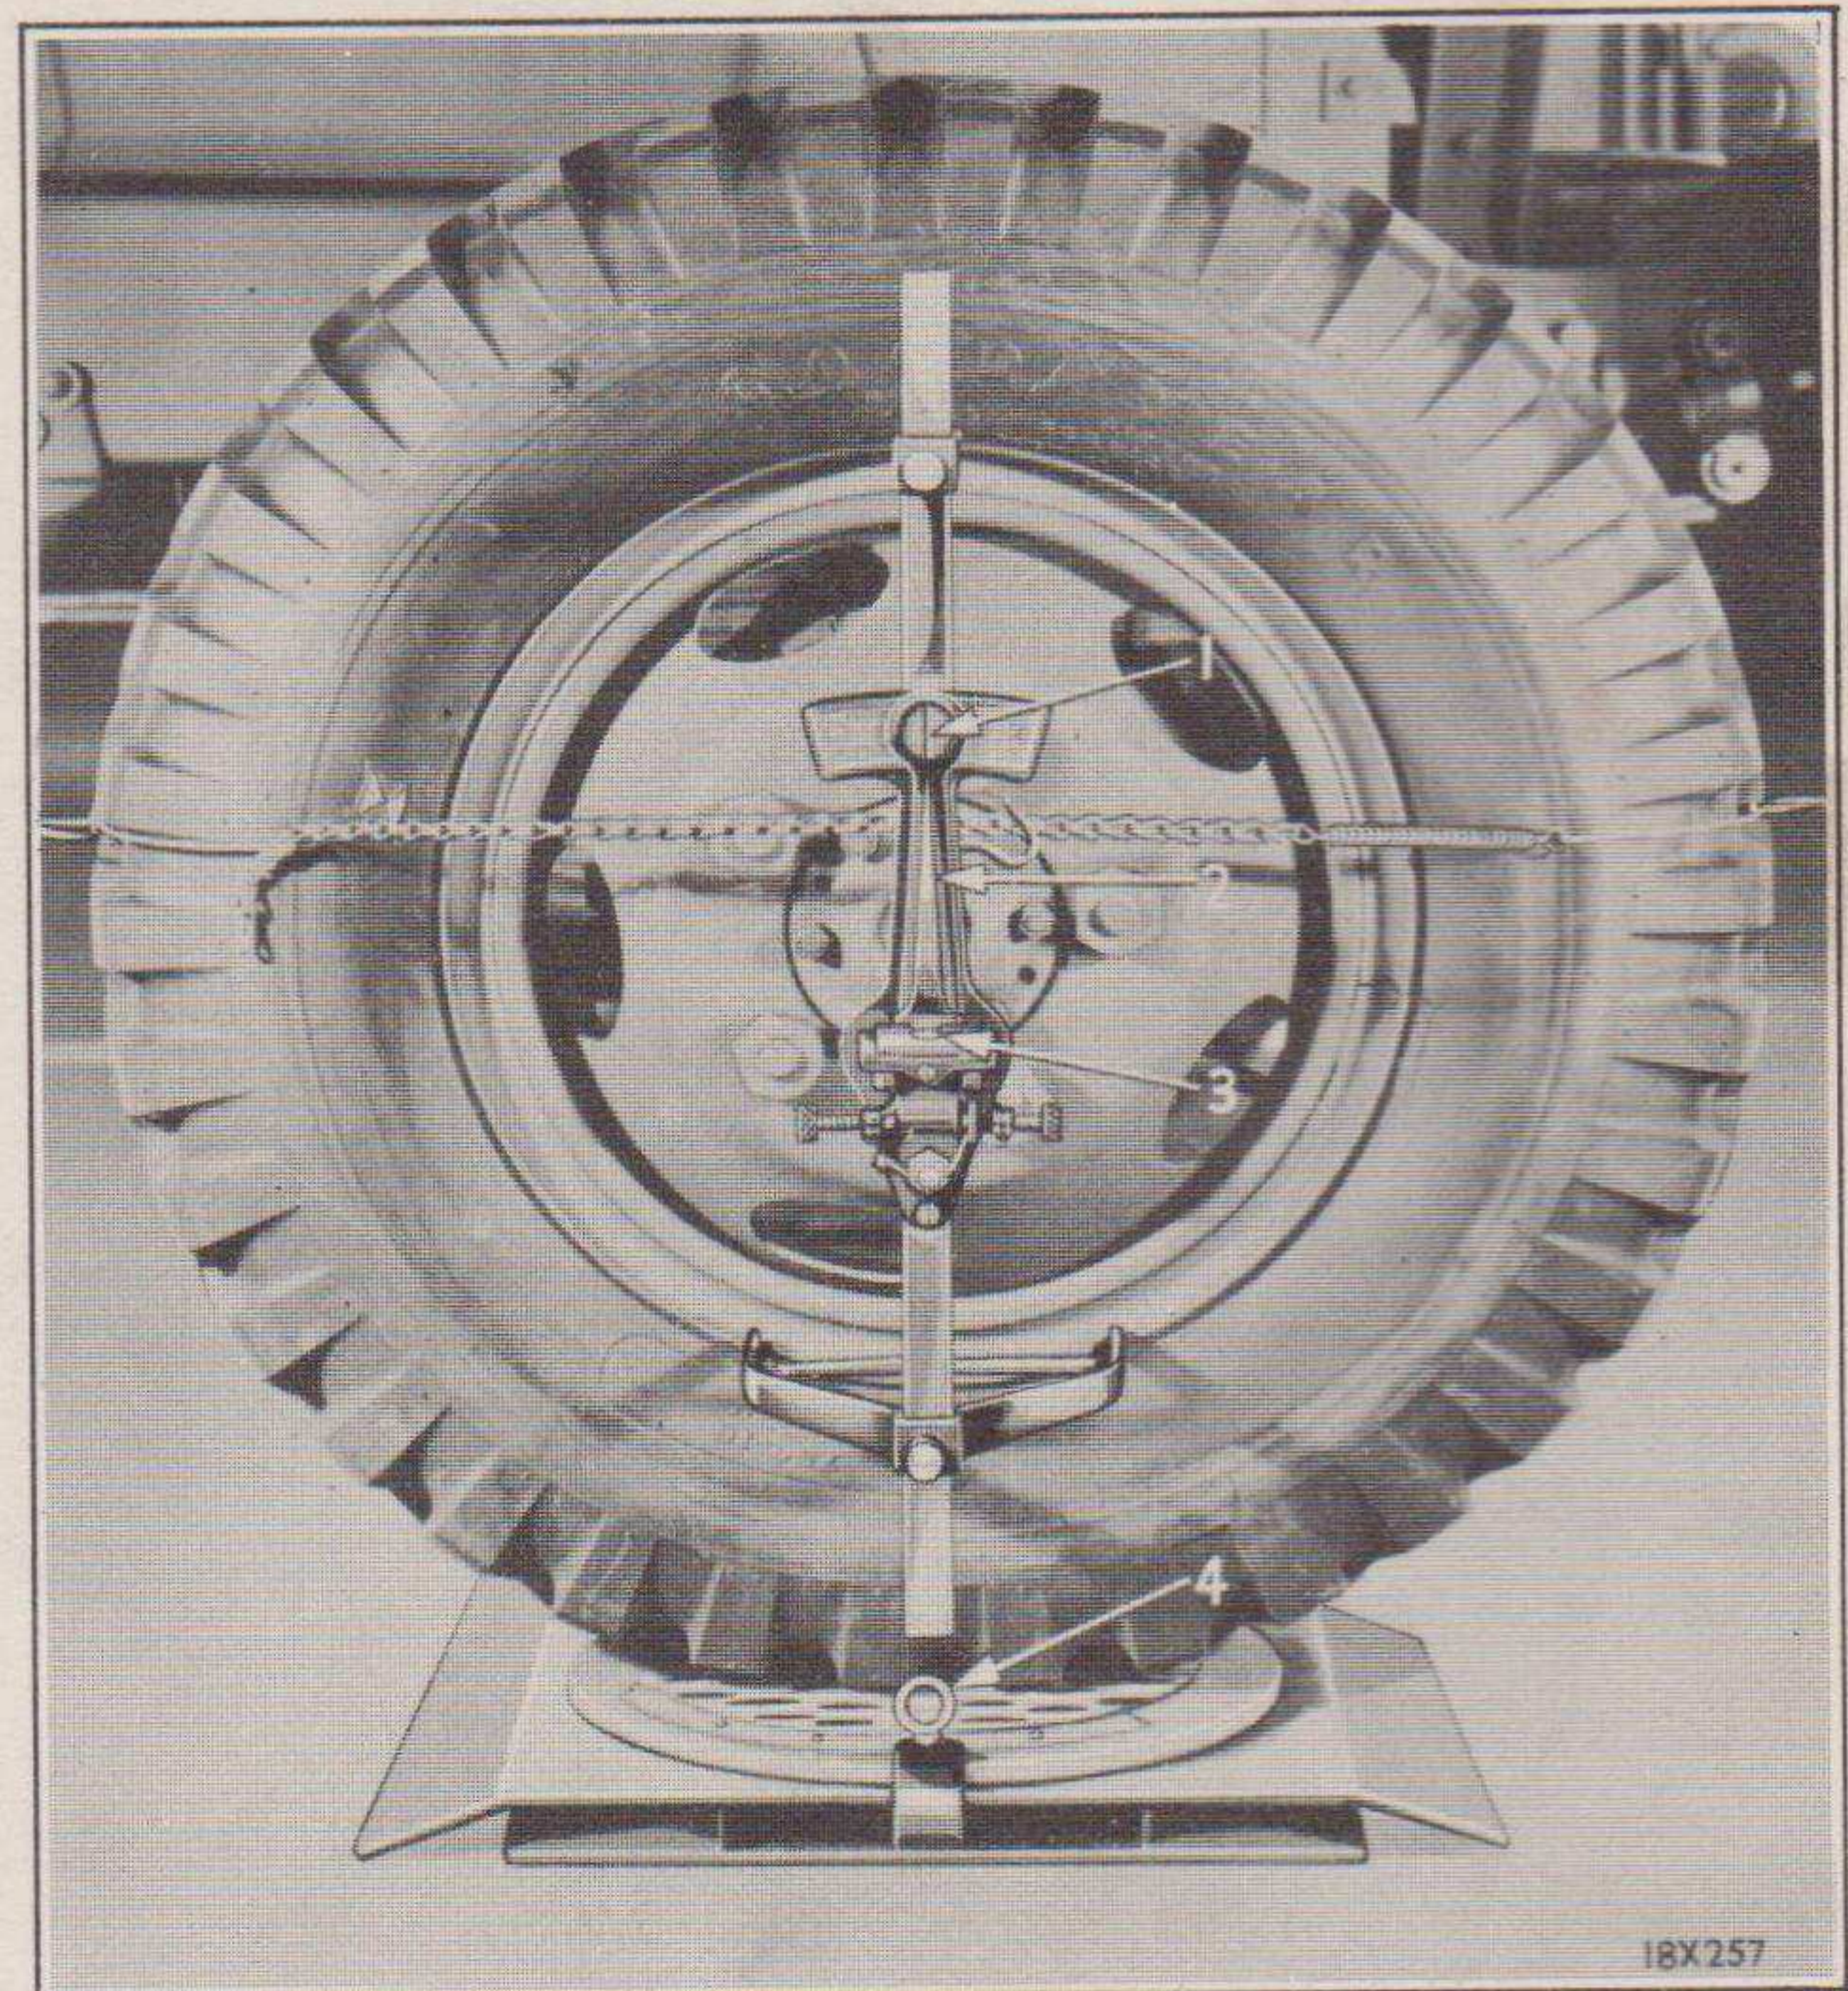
Checking King Pin Angle—Gauge on Right Wheel (Tool DD-428) (Turntables—Tool DD-435)
